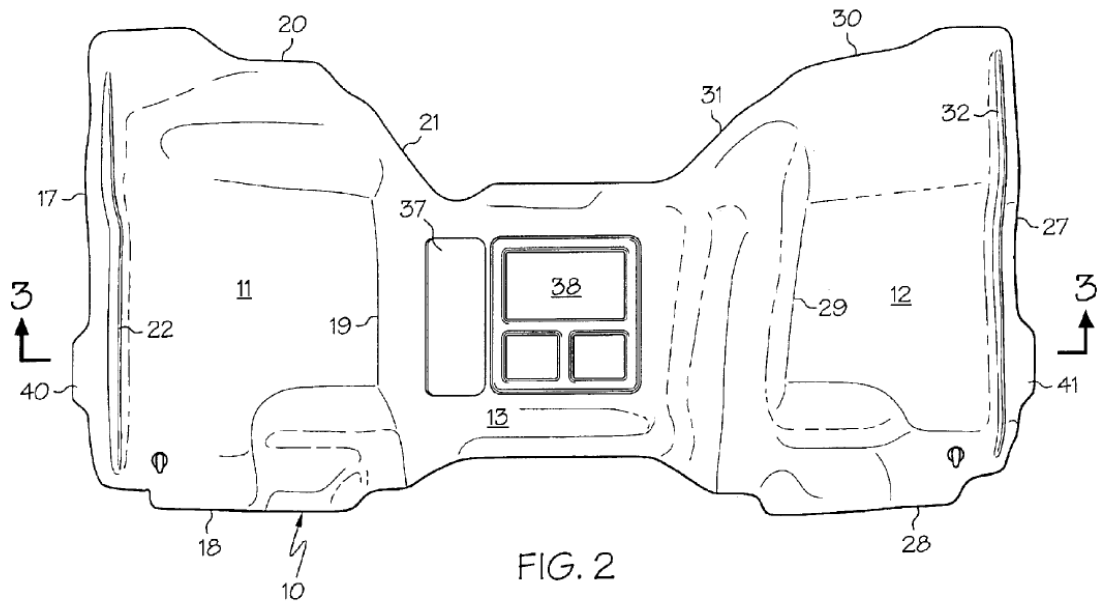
is a top plan view of the floor mat. Ex. 1005, 1:67.
